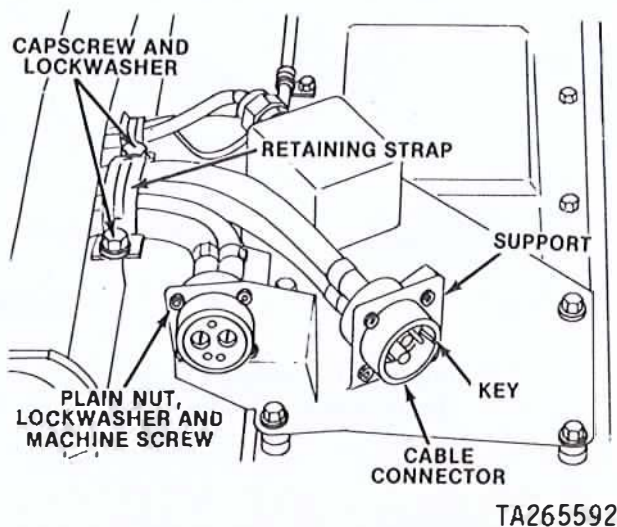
Removing or Installing Starter, Smoke, and Dust Detector Electrical Cable Connector
